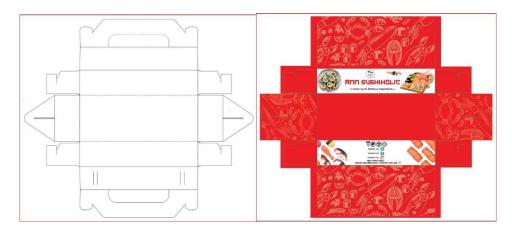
Innovation Sleeve Packaging with Carrier Technical Drawing
